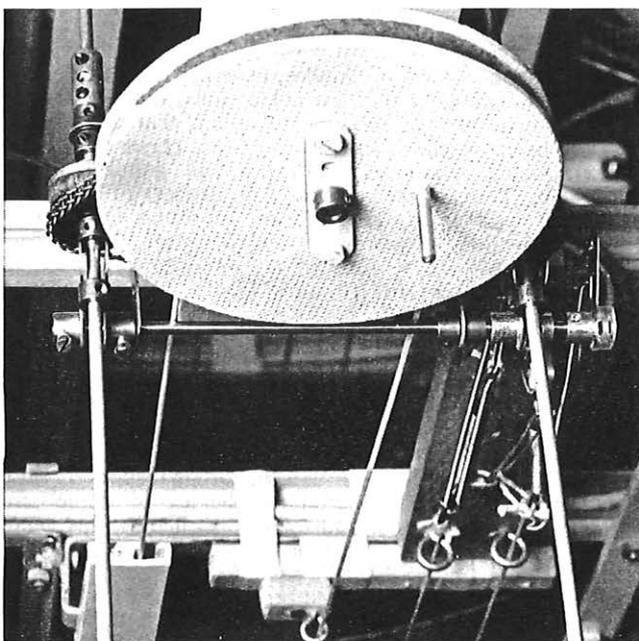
Driving pulley, chain transmission and clutch assemblies, viewed from below
